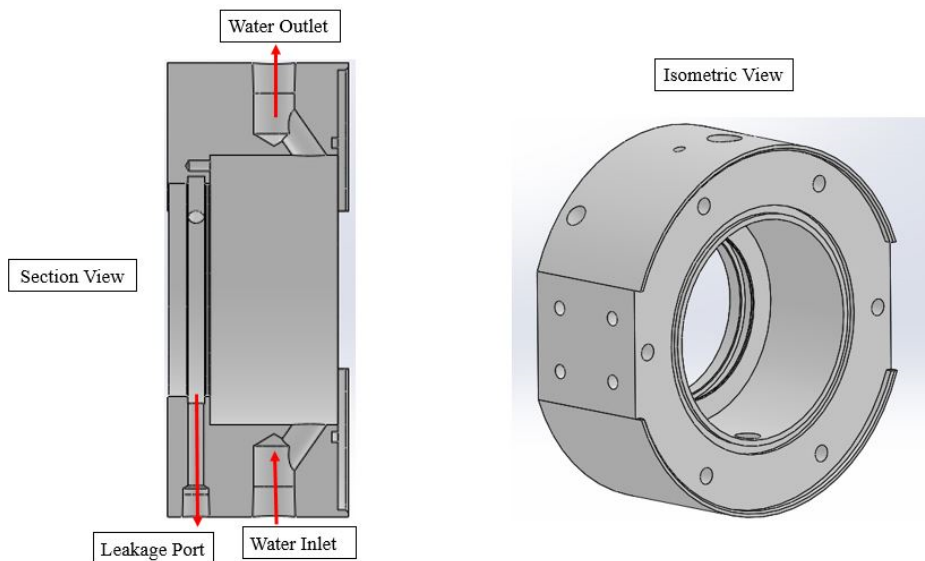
Section view with flow path of fluid and isometric view of primary gland
